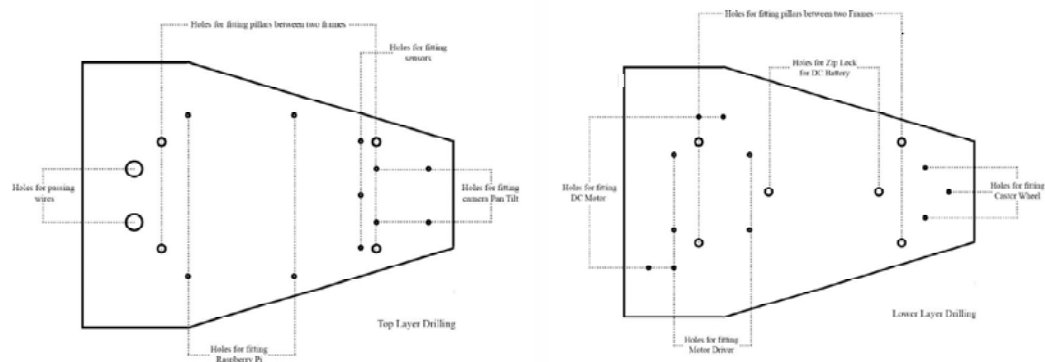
labeling for the drilled holes for component mounting, passing wires etc. for top layer of the frame.
